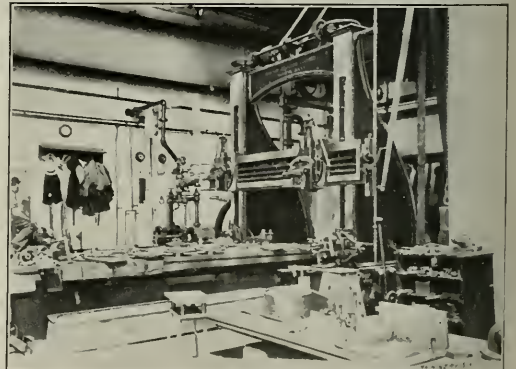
Planer. Built by Boston Machine Company, Boston, Mass., 1867. Eight feet 1 inch between Housings. Bed, 6 feet wide, 19 feet long. Will take 8 feet 4 inches under Rail.
